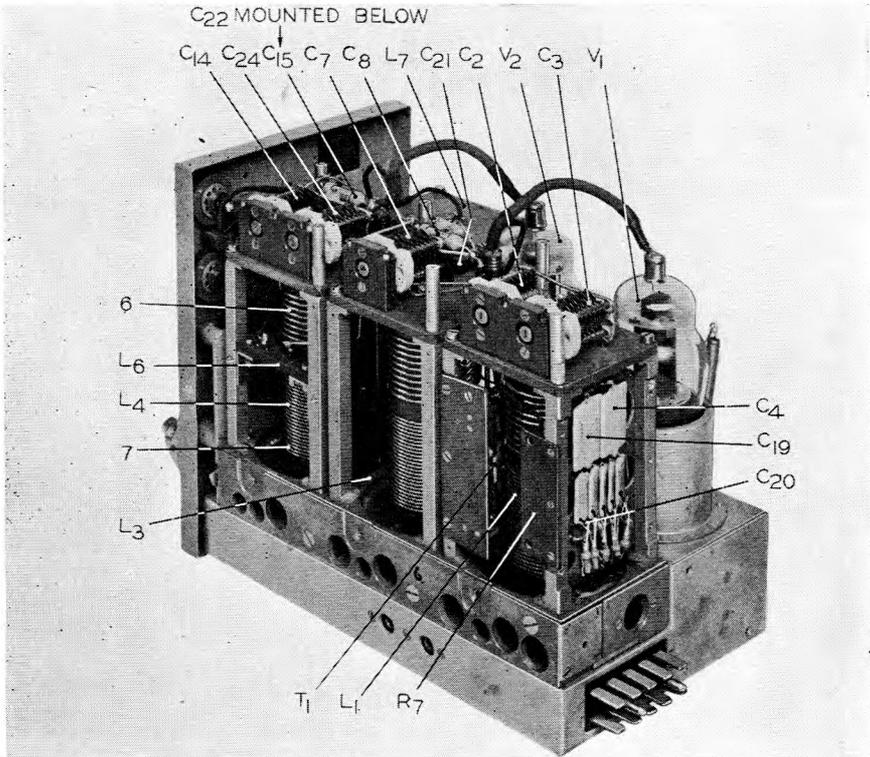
VIEW OF TRANSMITTER REMOVED FROM ITS CASE
